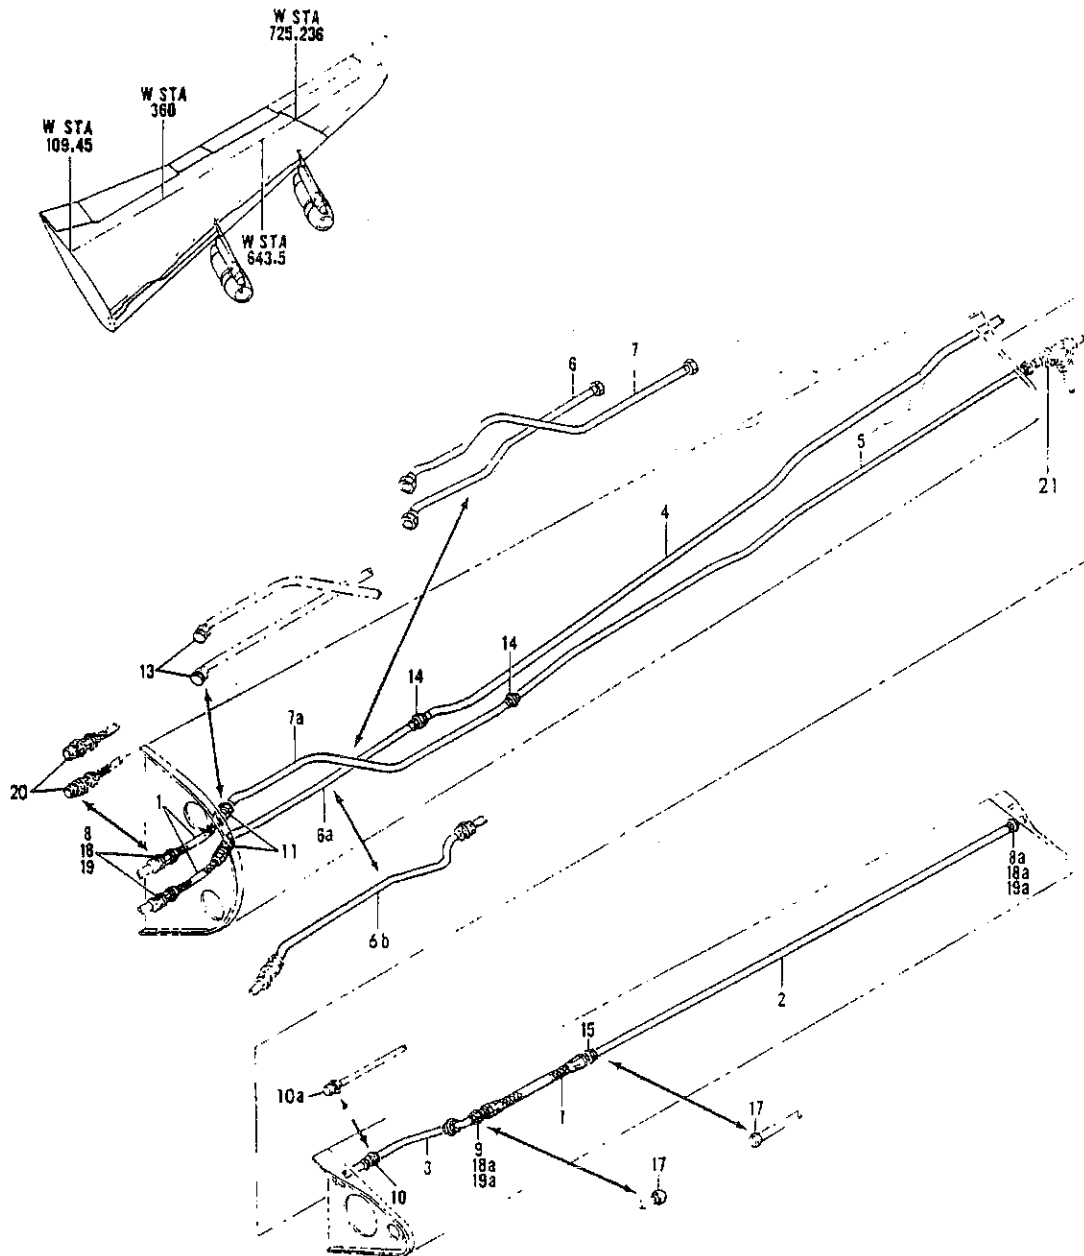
TUBING INSTL, SECTION 22 WATER INJECTION
